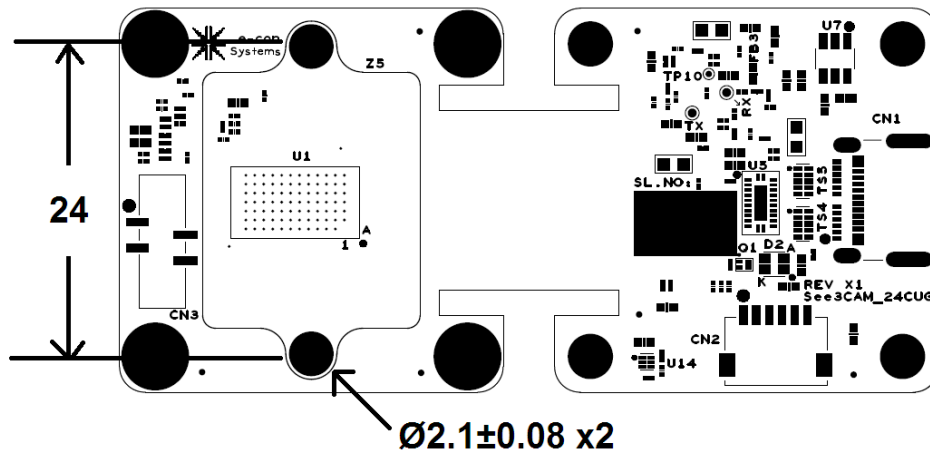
Bottom View of See3CAM_24CUG Mechanical Dimensions
